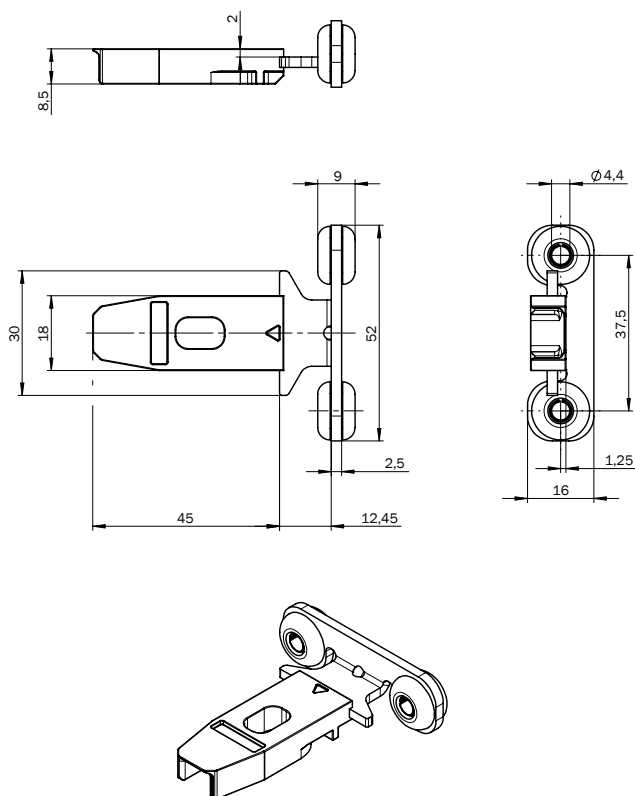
Dimensional drawing of TR110-XABT angled actuator (mm)
